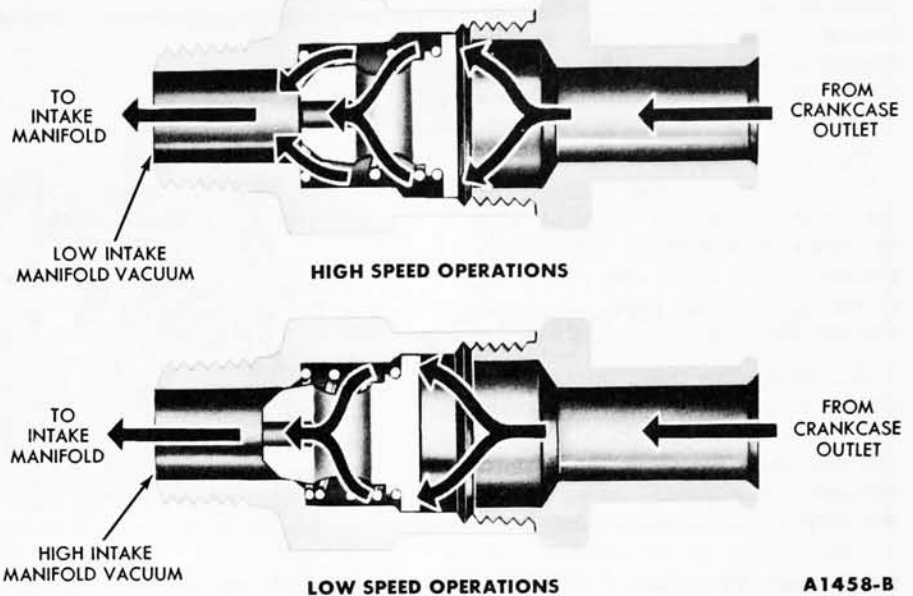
Positive Crankcase Ventilation Regulator Valve
